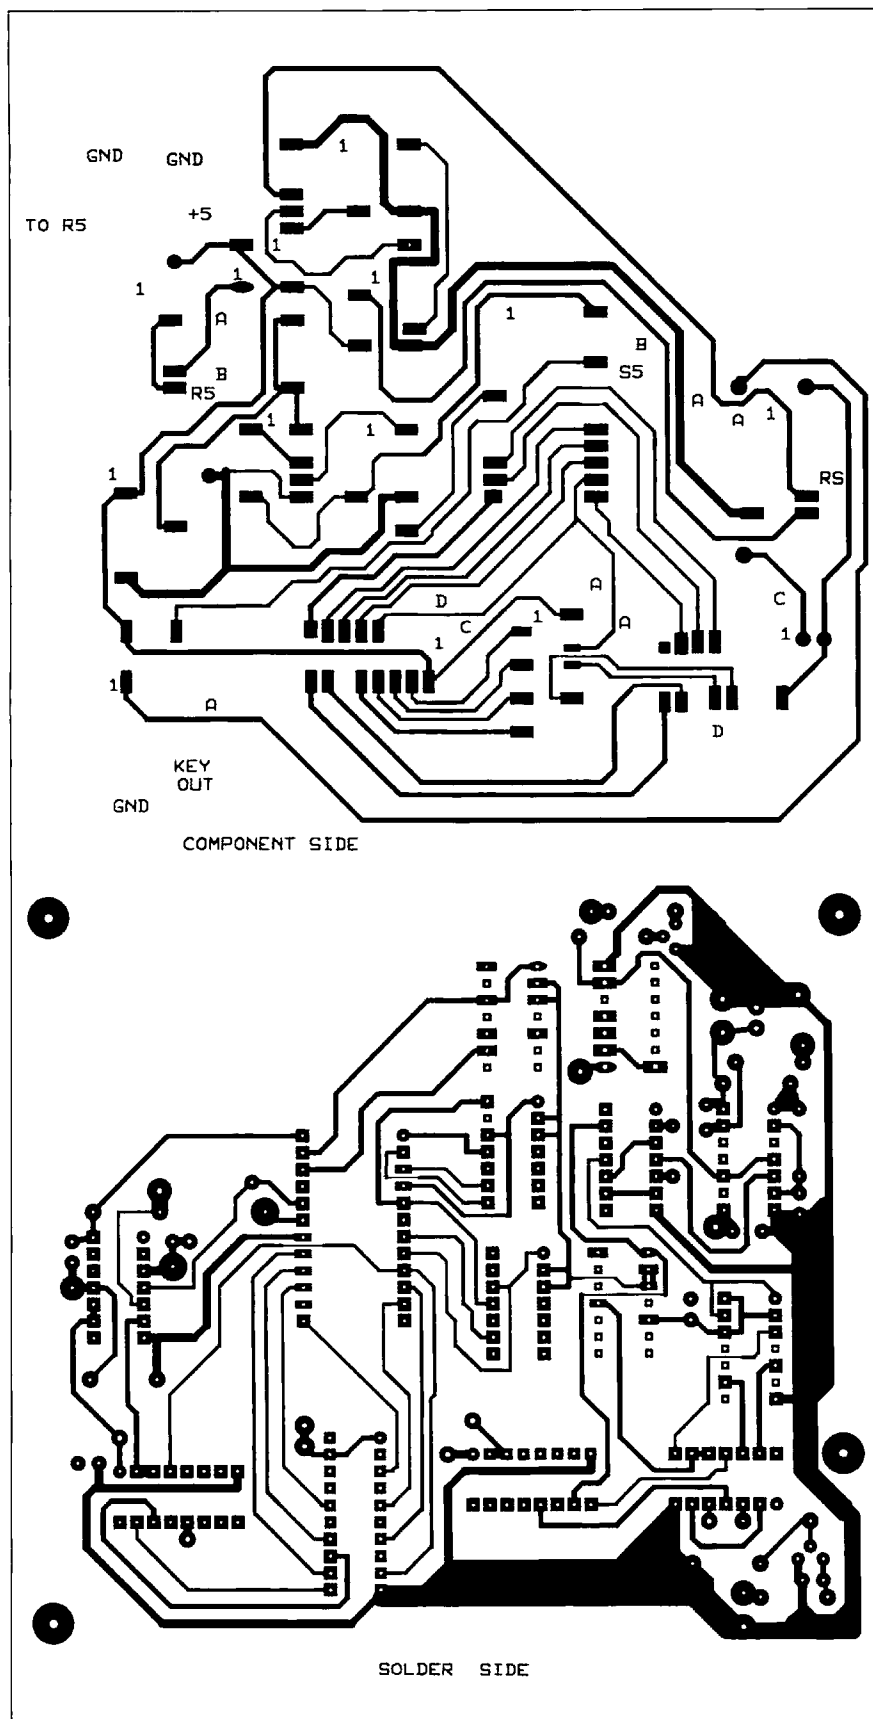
PC board foil patterns. Top layer (a) and bottom layer (b). Note: All pads on top layer must be soldered. Letters 'A' through 'D' indicate jumper locations.
